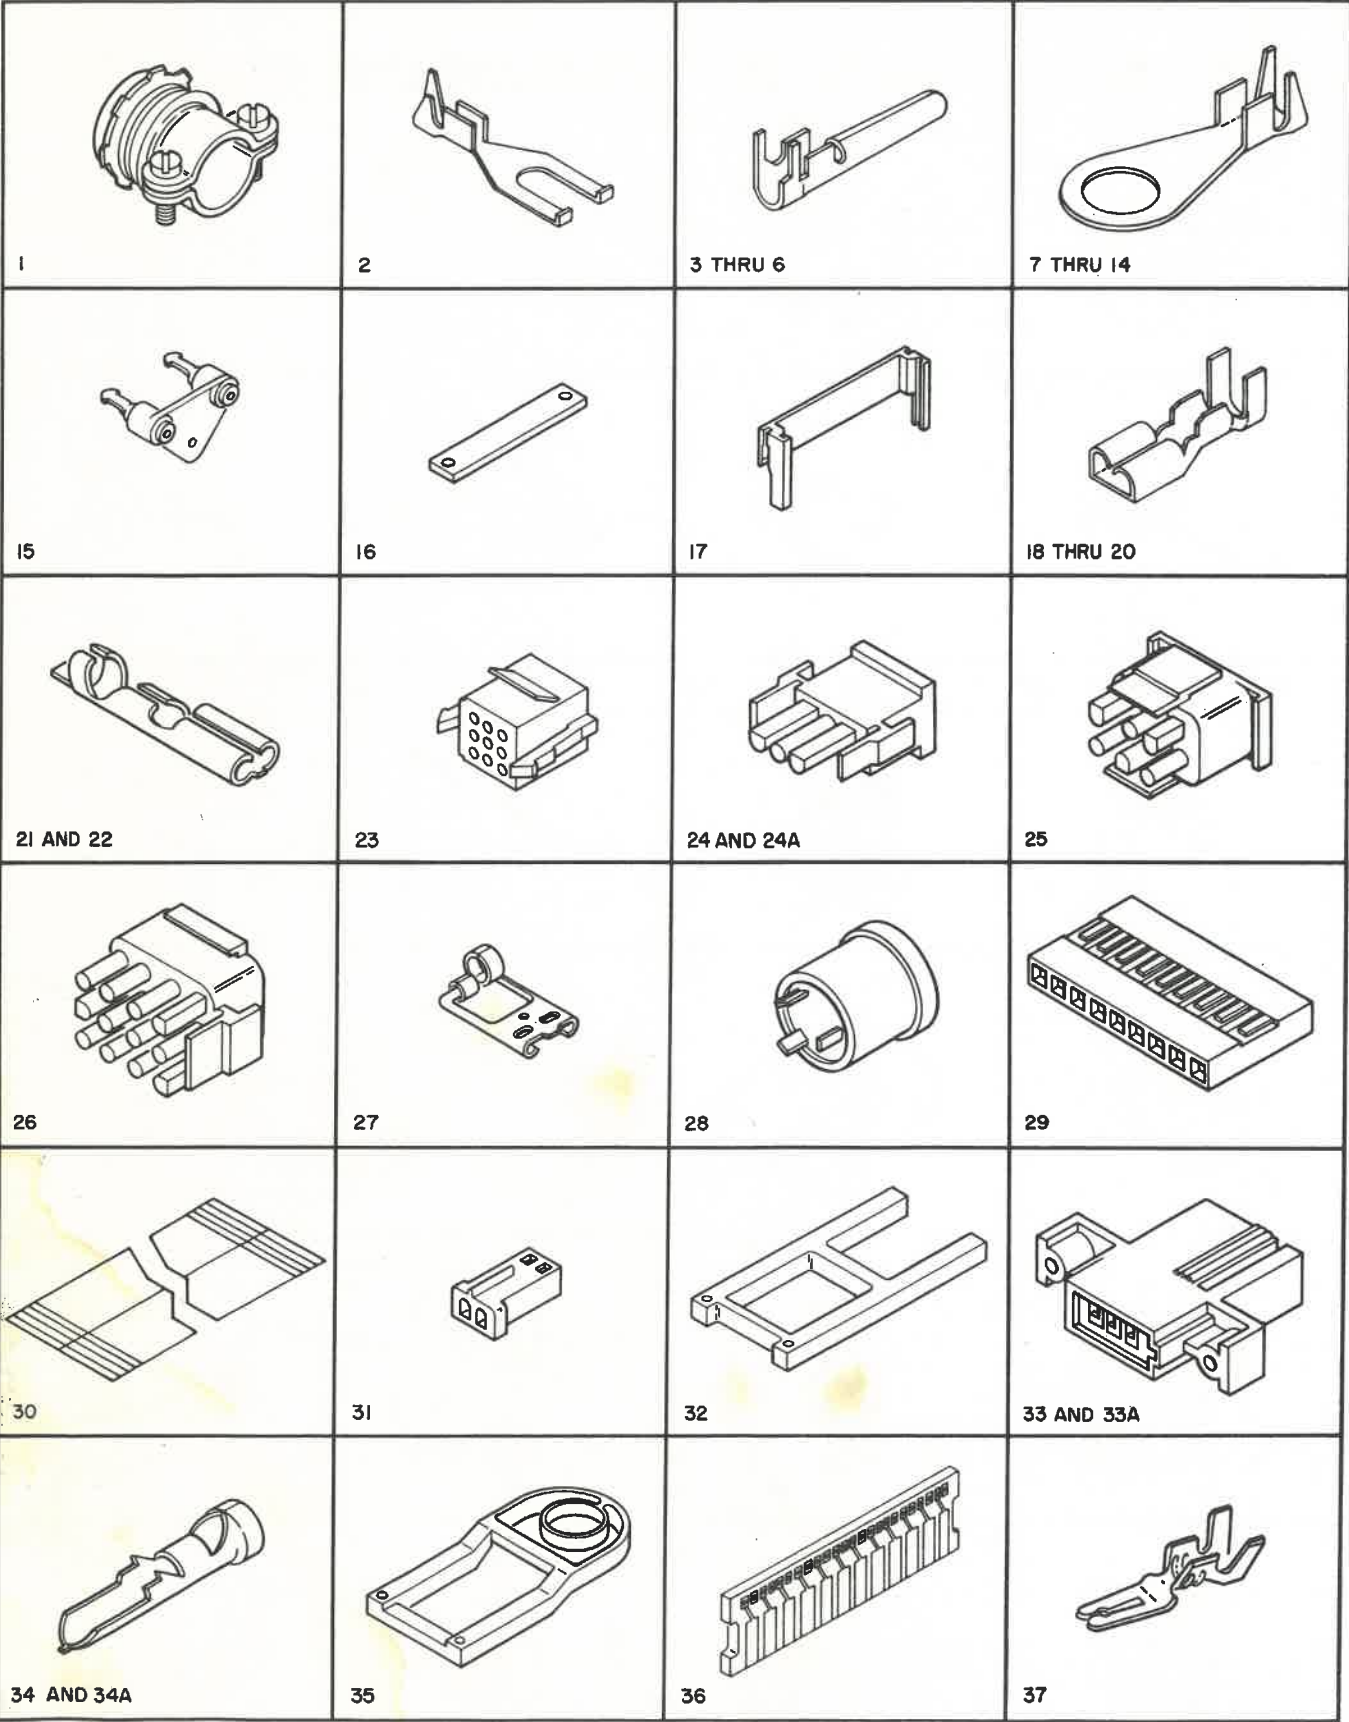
CABLE AND JUMPER ASSEMBLY COMPONENT PARTS. SHEET. 1 OF 3. INDEX NOS. 1-37. SEE LIST 12.
